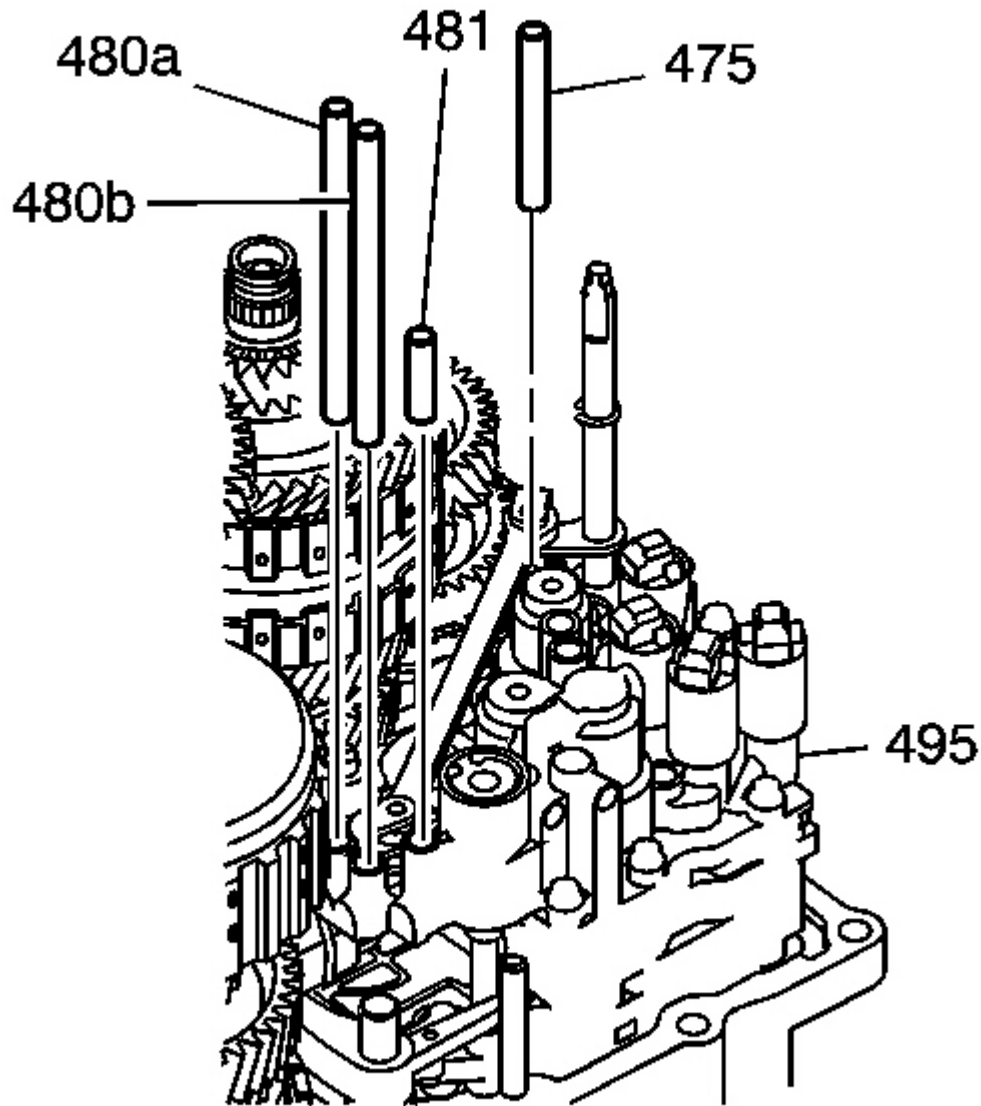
Clutch Control Fluid Pipe & Accumulator Valve Body
